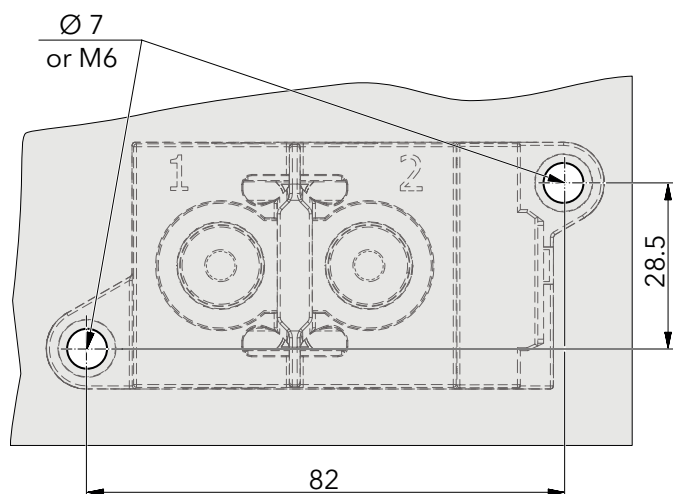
C303-XXX-G0P-....: Dimensions and layout of mounting holes
